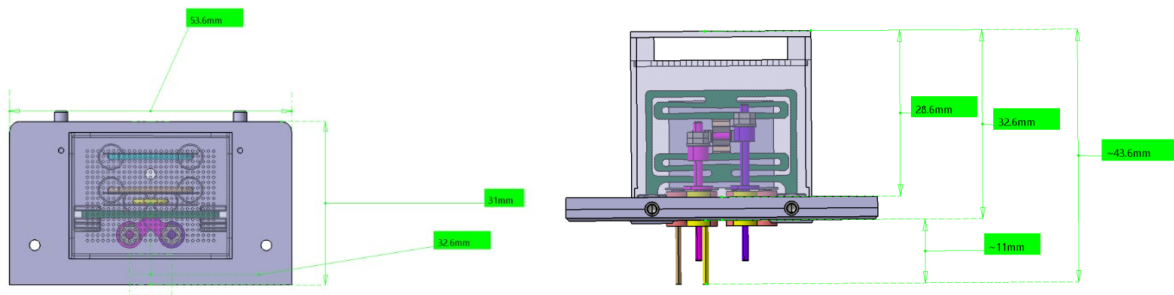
Bottom and lateral view of the DPG head & head housing assembly mounted onto the baseplate.
